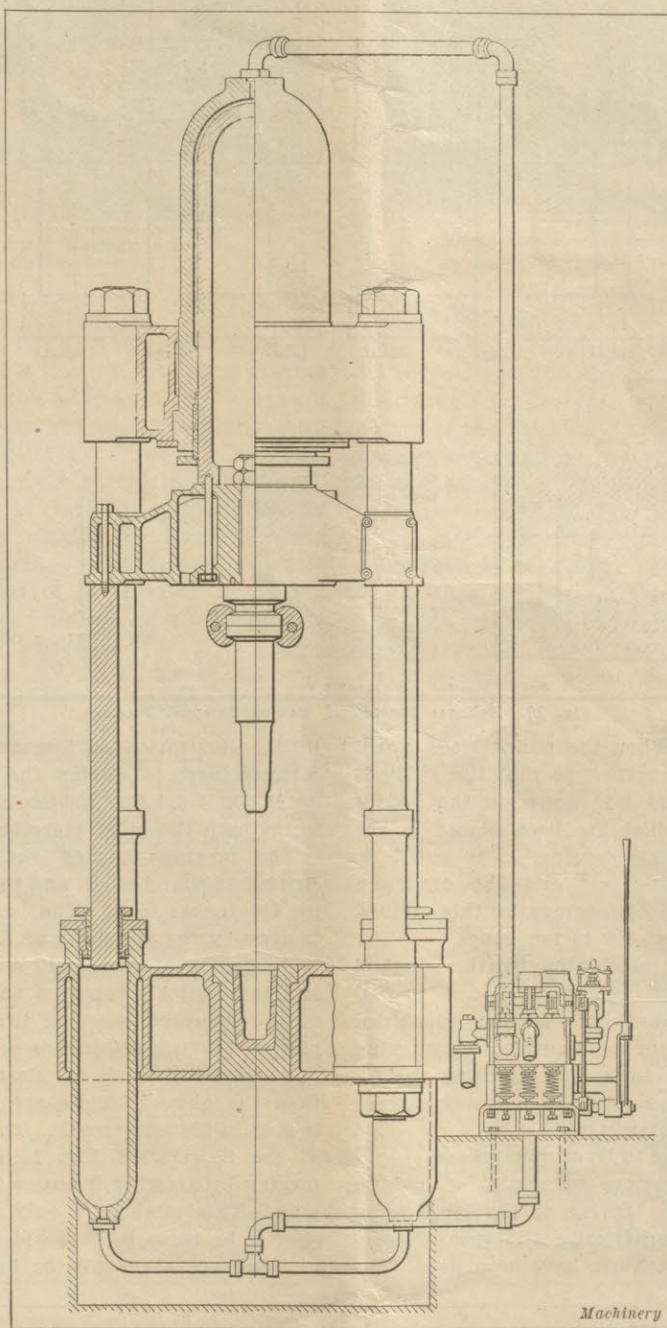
Watson-Stillman Hydraulic Forging Press of the Vertical Type used for making Shrapnel Forgings
